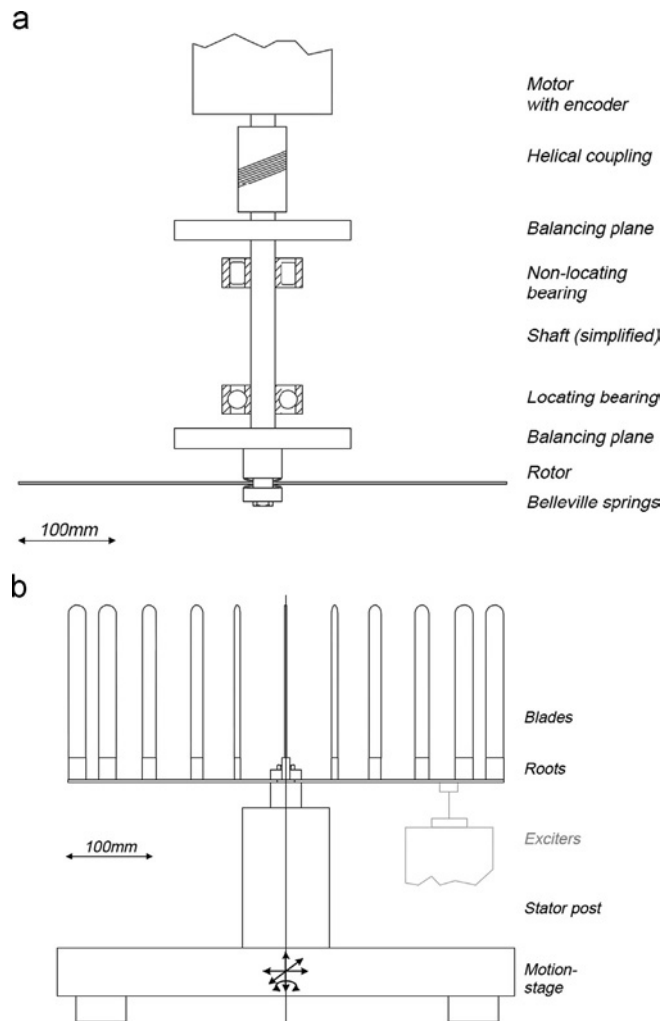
Test setup [1]. Rotor (a) and stator (b).
